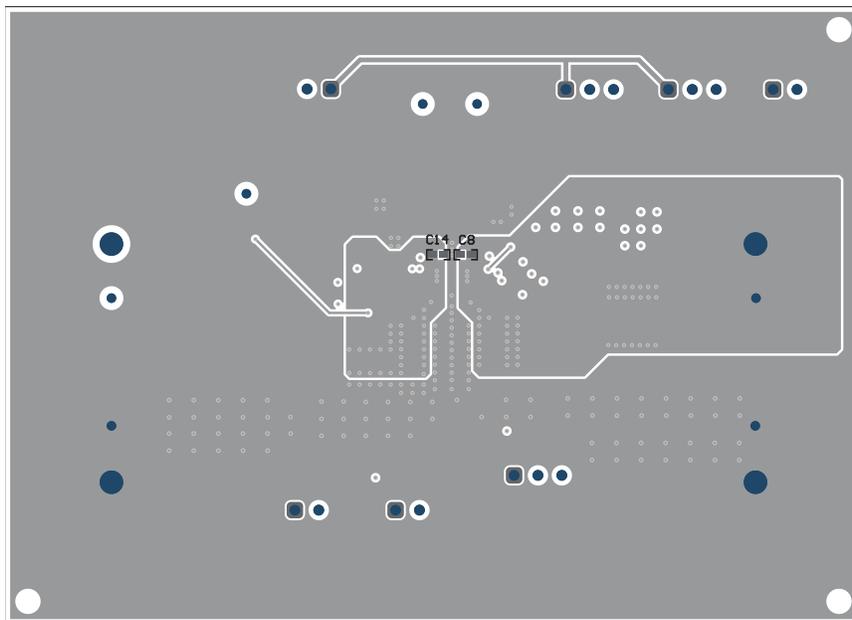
TPS552872EVM-029 Bottom-Side Layout
